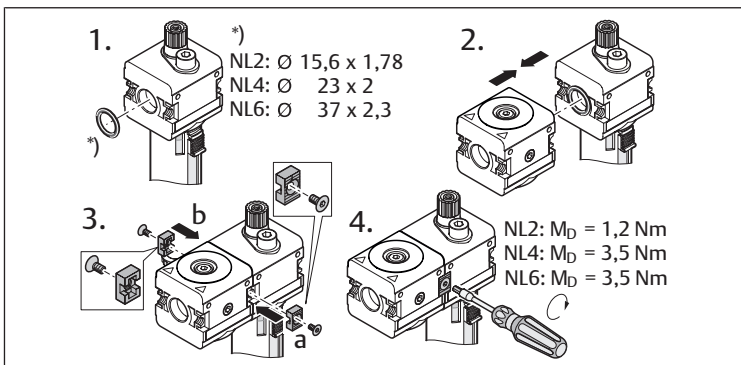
Block assembly with block assembly kit W04 | Series NL2, NL4, NL6
